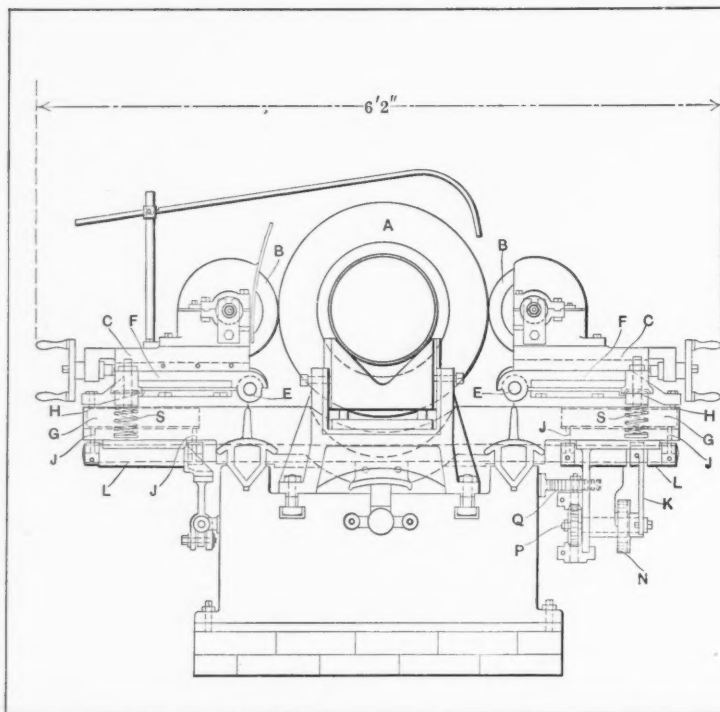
End View of Lobdell Roll Grinding Machine showing Carriage Construction
